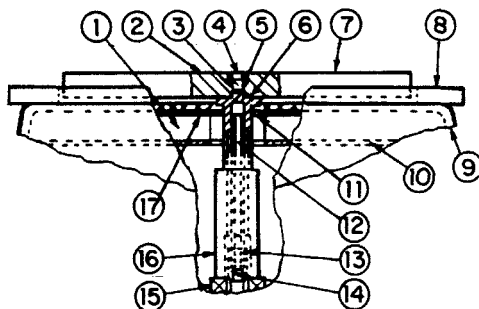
Modified single rotation unit. 1, heater assembly with cut-out clearance hole for shaft; 2, aluminum alloy rotating disk (1.5 cm \times 21 cm); 3, centering insert of ceramic support pedestal; 4, centering recess on both sides of disk; 5, bushing; 6, ceramic support pedestal and sleeve drive; 7, surface of rotating disk for substrates; 8, transit reaction chamber support plate; 9, pyroceram hot-plate top; 10, backing plate; 11, output for heating element; 12, steel tubing centering shaft; 13, Boston sleeve coupling (# GR4); 14, hexagonal socket heat cap screw; 15, thrust bearing (Aetna F-1); 16, stainless steel sleeve-drive to motor shaft; 17, mica insulation with cut-out clearance hole for shaft. (After Kern, 1975.)
